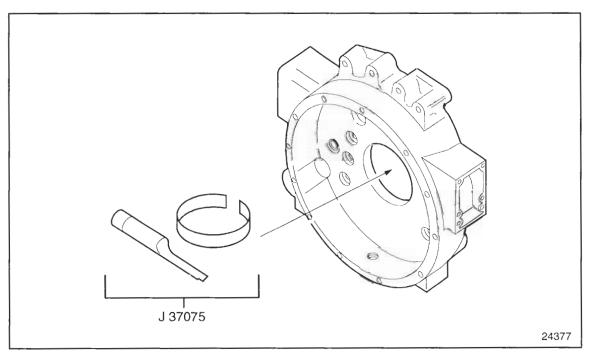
Oil Sleeve Wear Sleeve Removal
